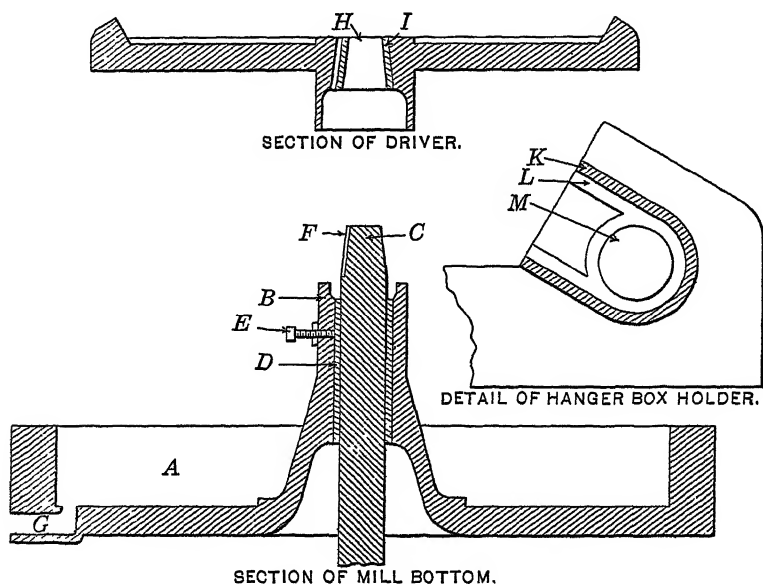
DRIVER AND BOTTOM, AND DETAIL OF HANGER-BOX HOLDER OF HUNTINGTON MILL.
